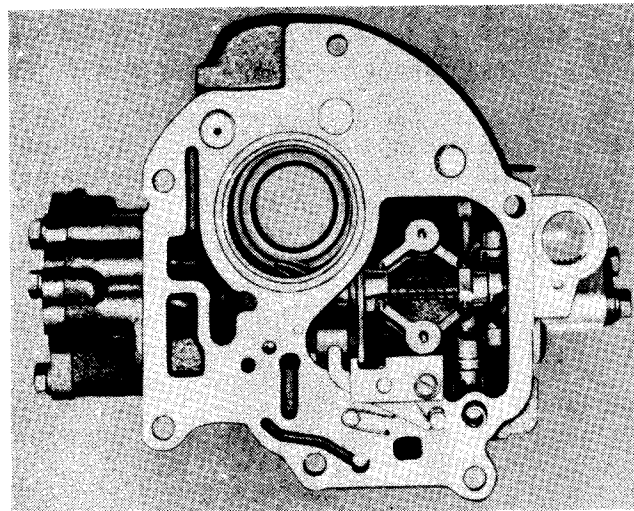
SAME CASE WITH DIRECT DRIVE LOCK-UP PAWL REMOVED BEFORE INSTALLING IN 1953 COMMANDER MODELS WITH STUDEBAKER AUTOMATIC DRIVE.
